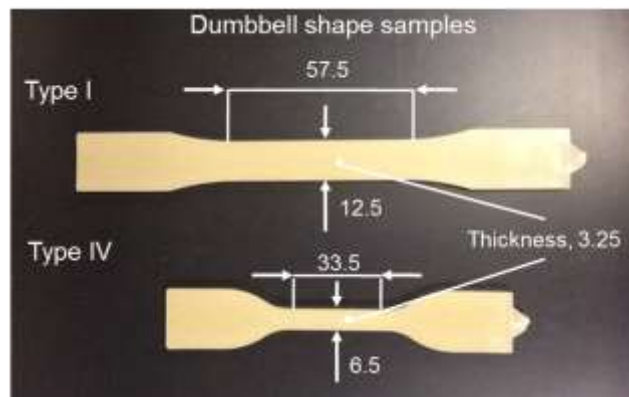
Injection molding samples (type I and IV from ASTM D638), dimensions are in mm
